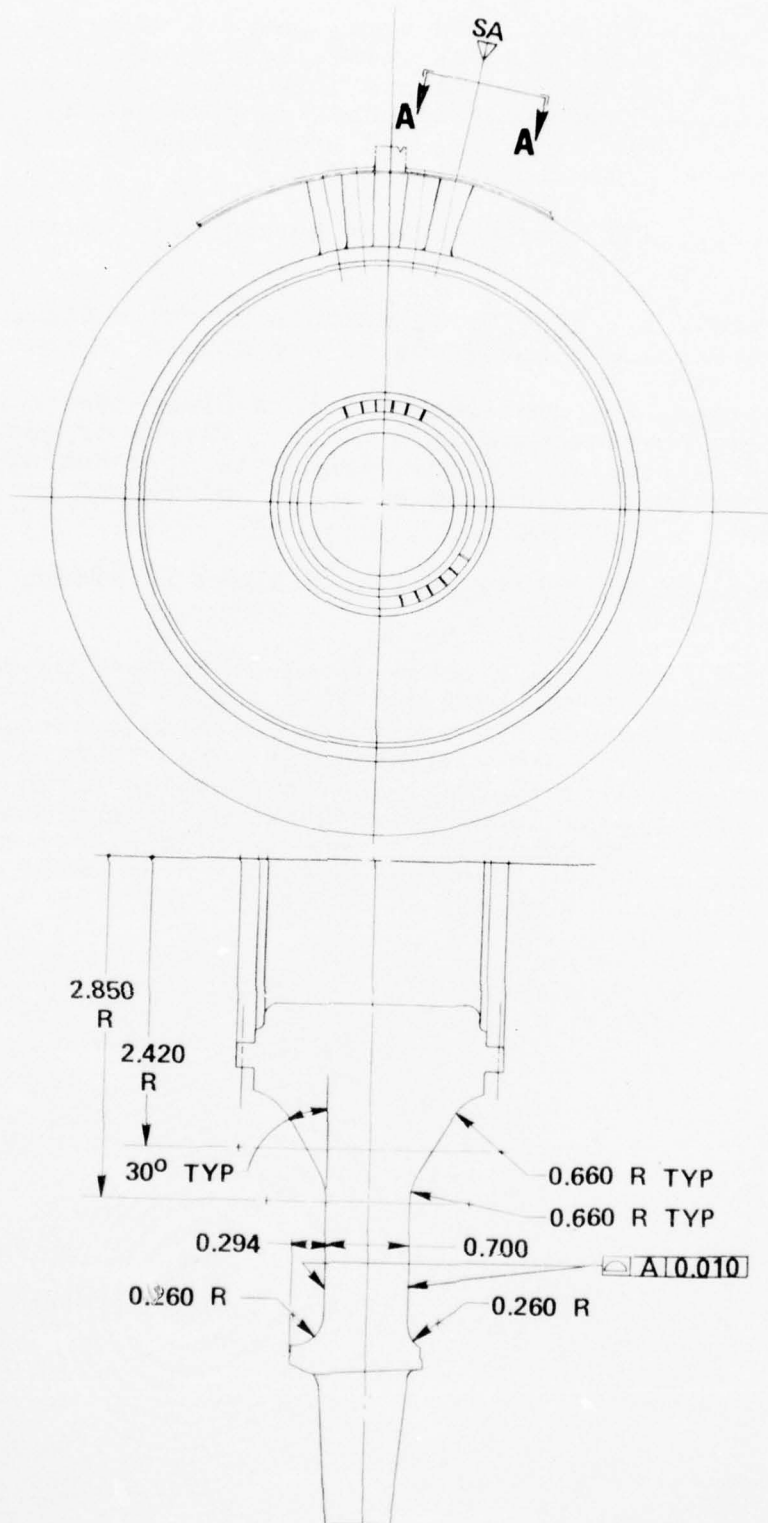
(a) Final Laminated Turbine Rotor Detail Design.
